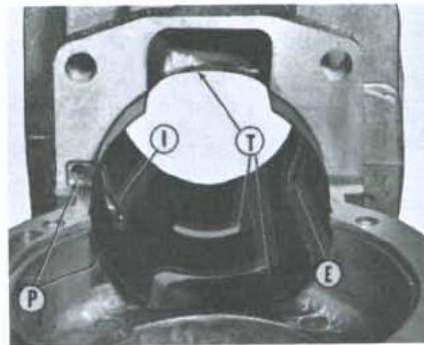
Cylinder installed on crankcase half showing relative location of cylinder ports.
